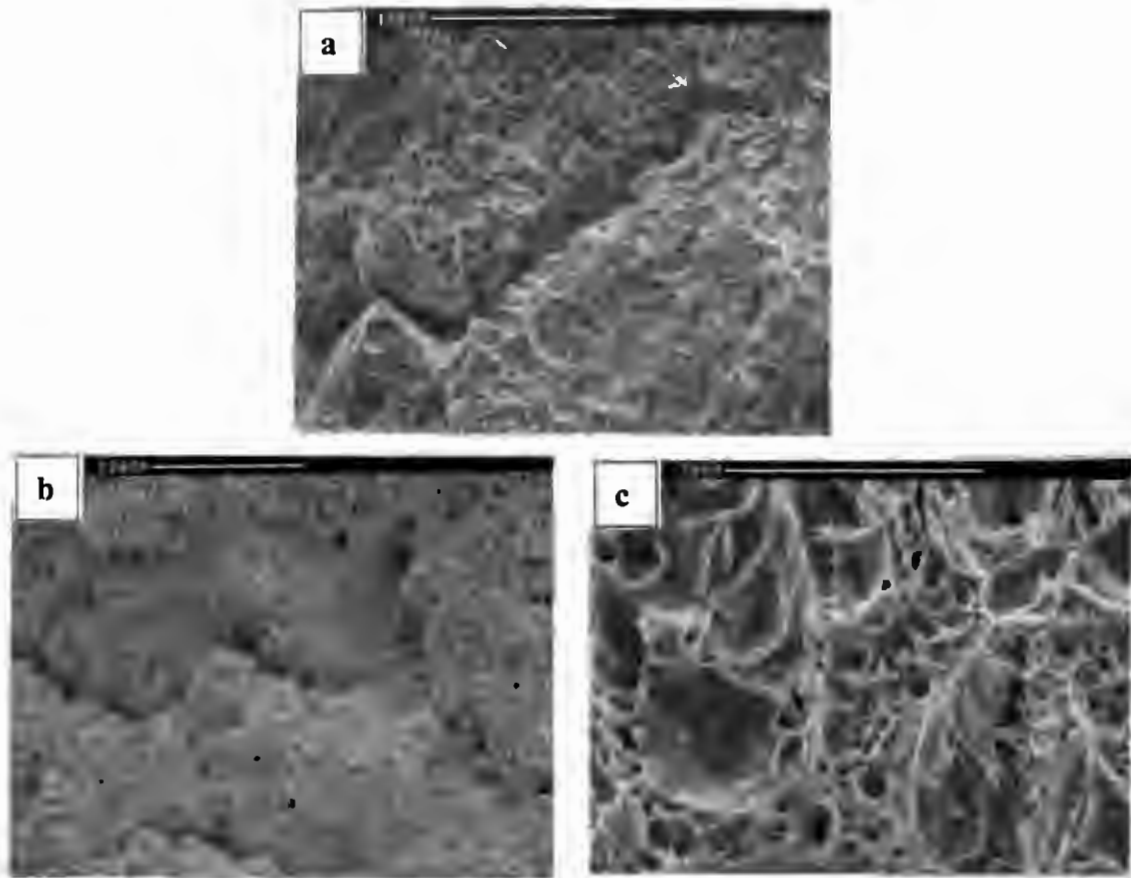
Impact fracture surfaces of tests at 20°C.
